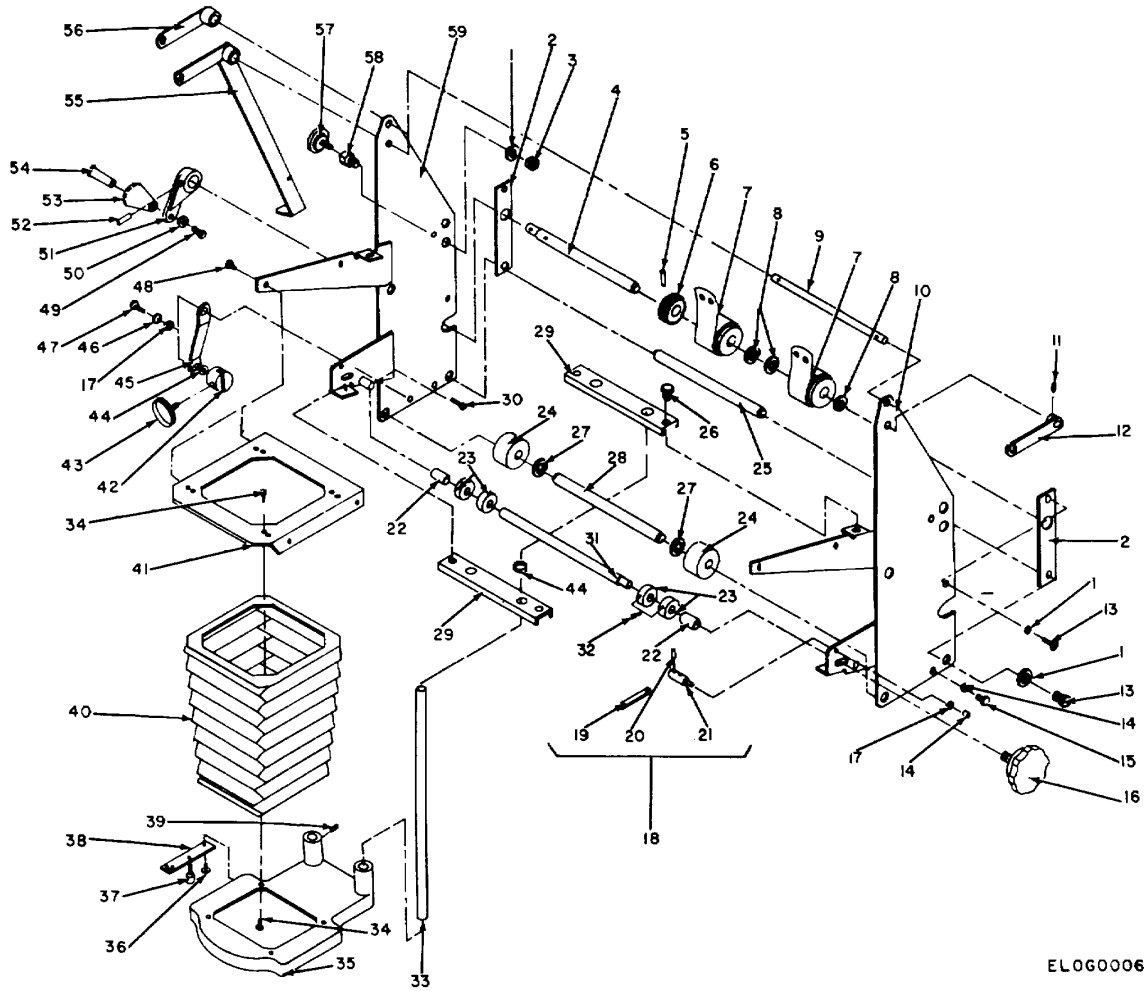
Printer, Projection, Photographic EN-91B, Condenser Lens Assembly.
